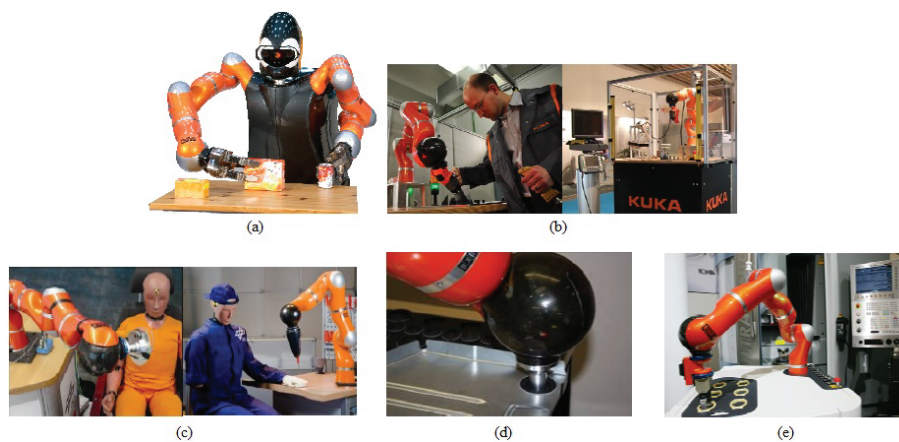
(a) DESIRE technology, (b) SMERobot's welding operation, (c) Safety demonstration of PHIRENDS, (d) Manufacturing scenario by placing rubber closures, (e) loading/unloading machine (Source: Bischoff et al., 2010)
